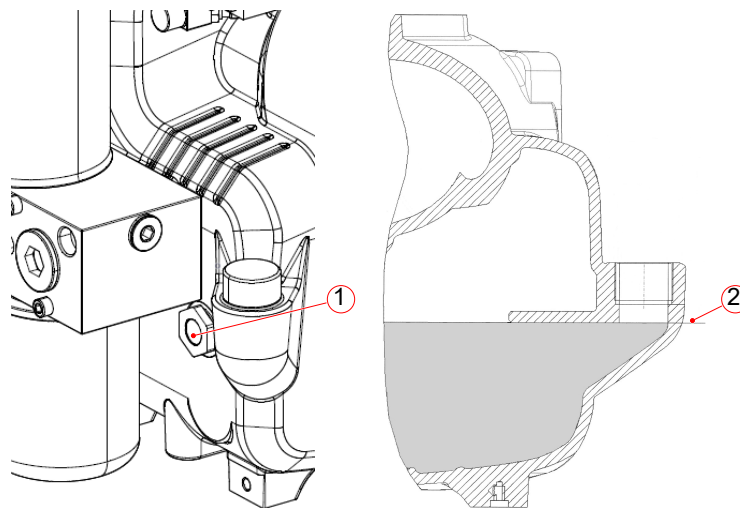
Checking the oil level via the oil sight glass and oil plug / air end PRO6
